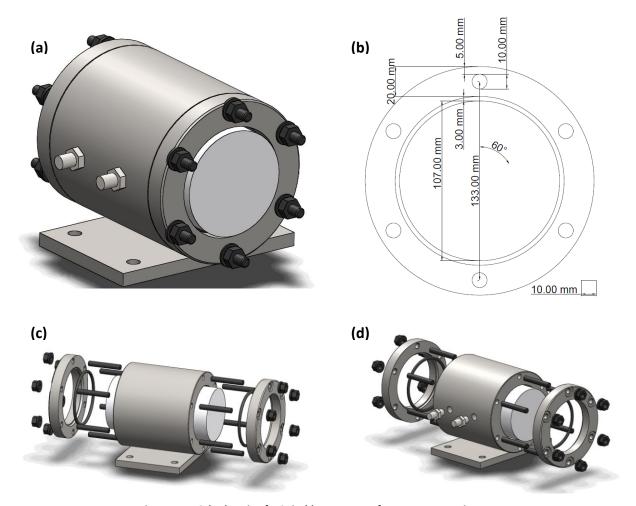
Schedmatic of a Suitable Apparatus for Pressure Tension Test (a) Unexploded rear view with gas inlet and outlet (b) Side view with dimensions (c) Exploded front view (c) Exploded rear view with gas inlet and outlet
